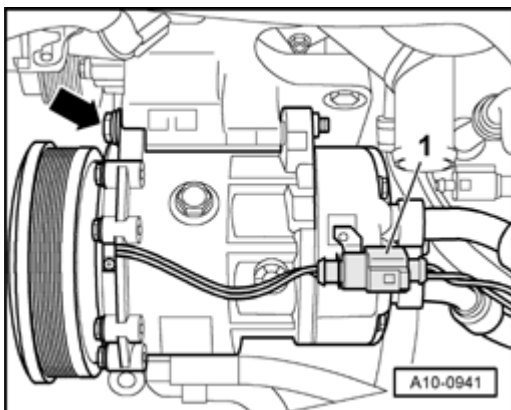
Disconnecting Electrical Connector For Air Conditioning Compressor Clutch
